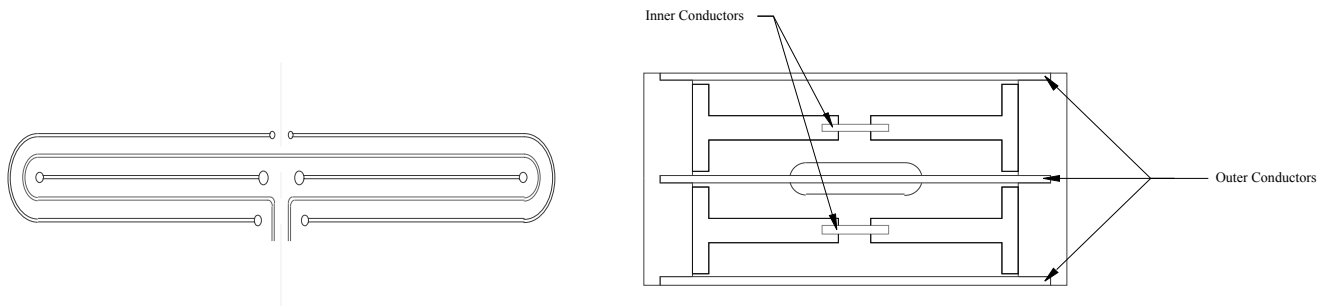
Cutaway side (left) and end (right) views of the mechanical drawings of the rectangular coax FWG.
